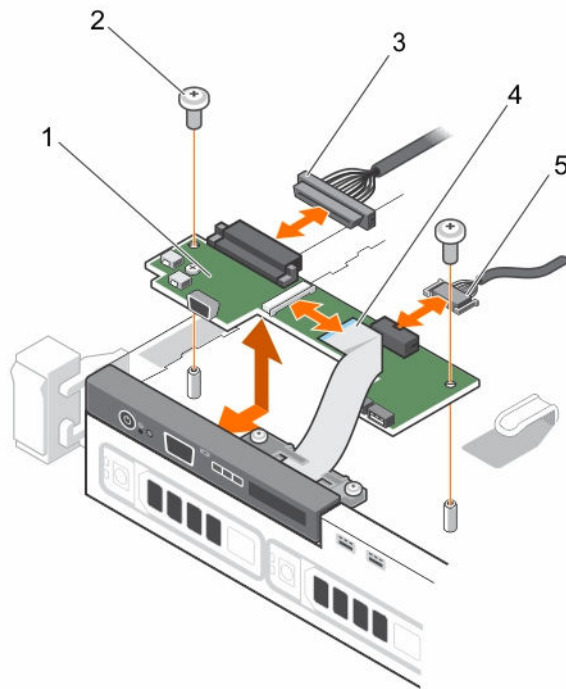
Removing and installing the control panel module—four hard-drive chassis
